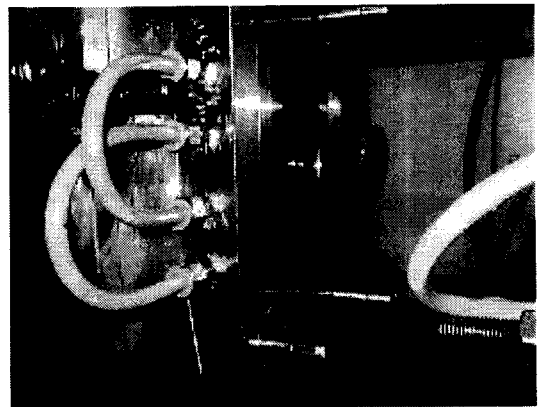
Mold system in injection molding machine using microcellular foaming process
